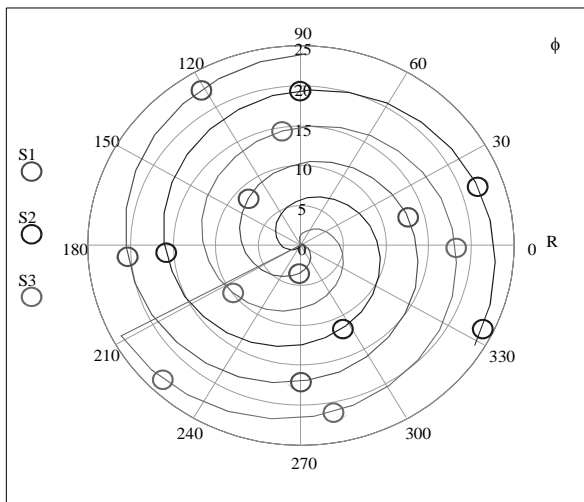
The design of cutting edge holes distribution on the bowl cutter surface
